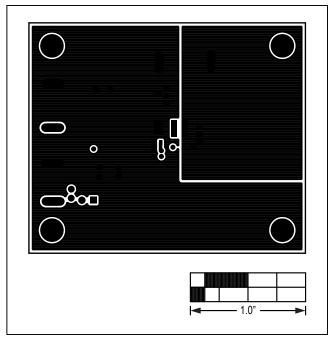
MAX17515 EV Kit PCB Layout—Solder Side
